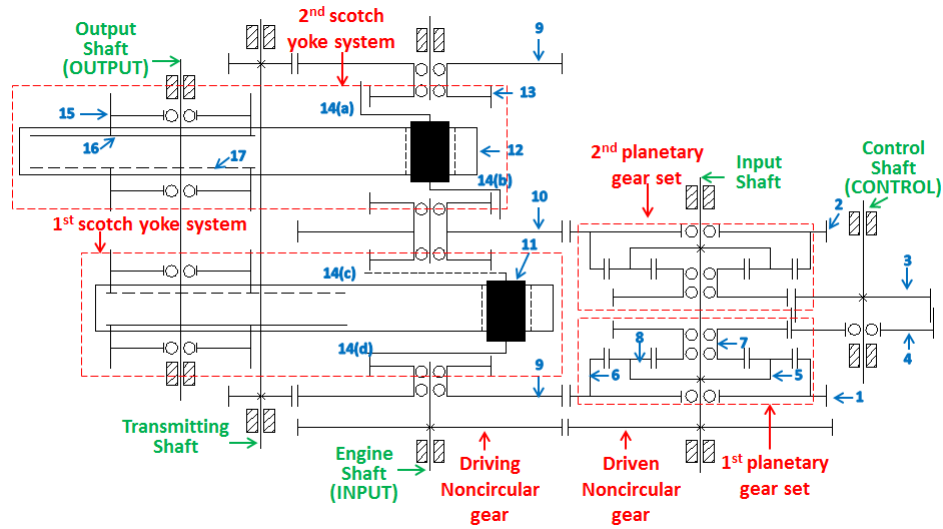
Schematic diagram of the SGIVT. 1- output gear of the first planetary gear set, 2- output gear of the second planetary gear set, 3- gear on the control shaft, 4- gear on the idler shaft, 5- carrier, 6- ring gear, 7- sun gear, 8- planet gear, 9- input gears of scotch yoke systems driven by the first planetary gear set, 10- input gear of scotch yoke systems driven by the second planetary gear set, 11- pin, 12- yoke, 13- crank gear, 14(a-d)- racks meshed with crank gears in four directions, 15- output gear, 16- rack meshed with the output gear on the top side of the yoke represented by a solid line, 17- rack meshed with the output gear on the bottom side of the yoke represented by a dashed line.
